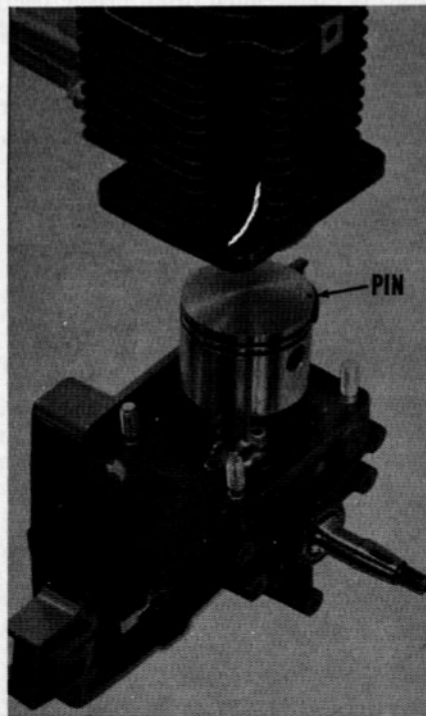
Piston and connecting rod assembly can be removed from crankpin after removing cylinder from crankcase. Note piston ring locating pin on intake side of piston.
